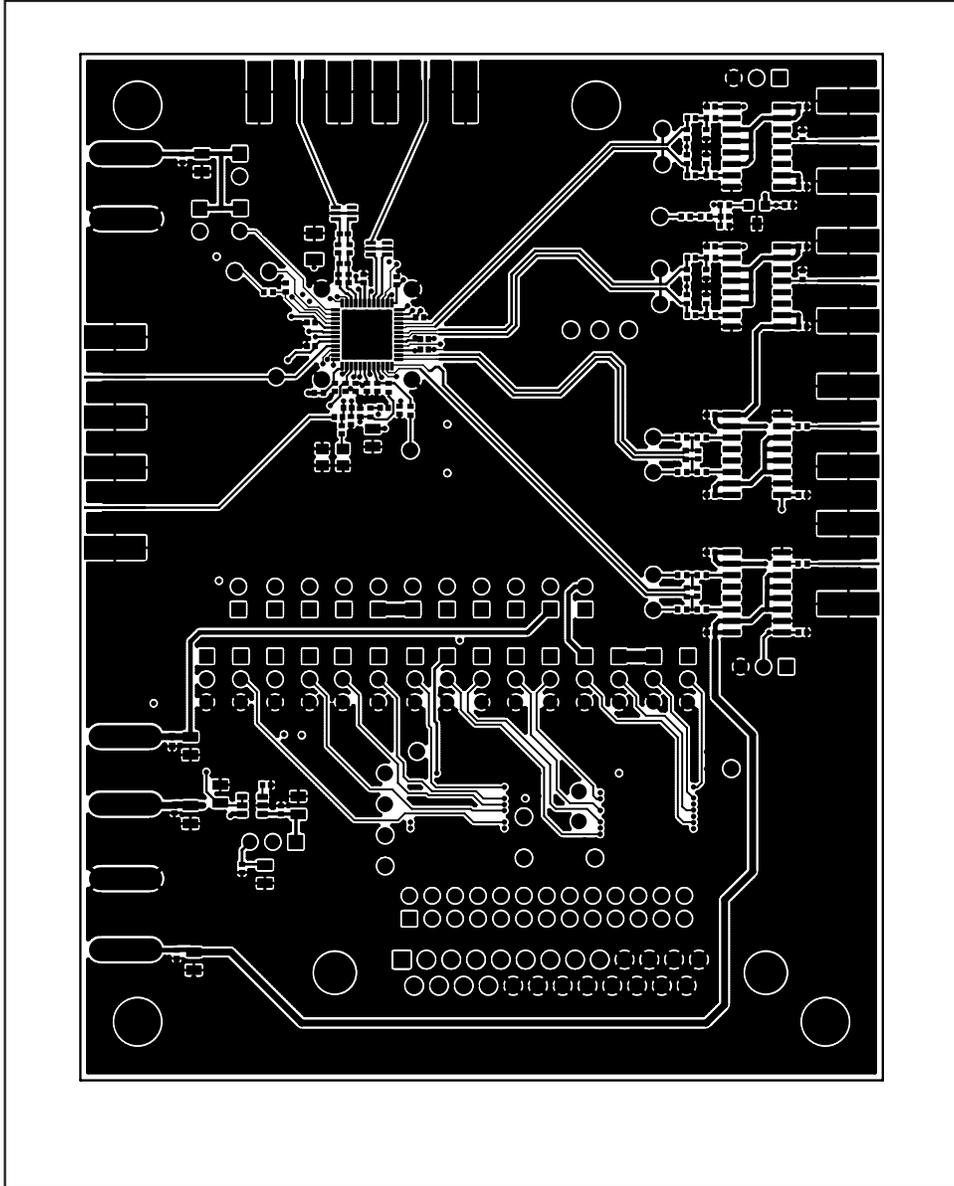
MAX2830 EV Kit PCB Layout—Component Side
